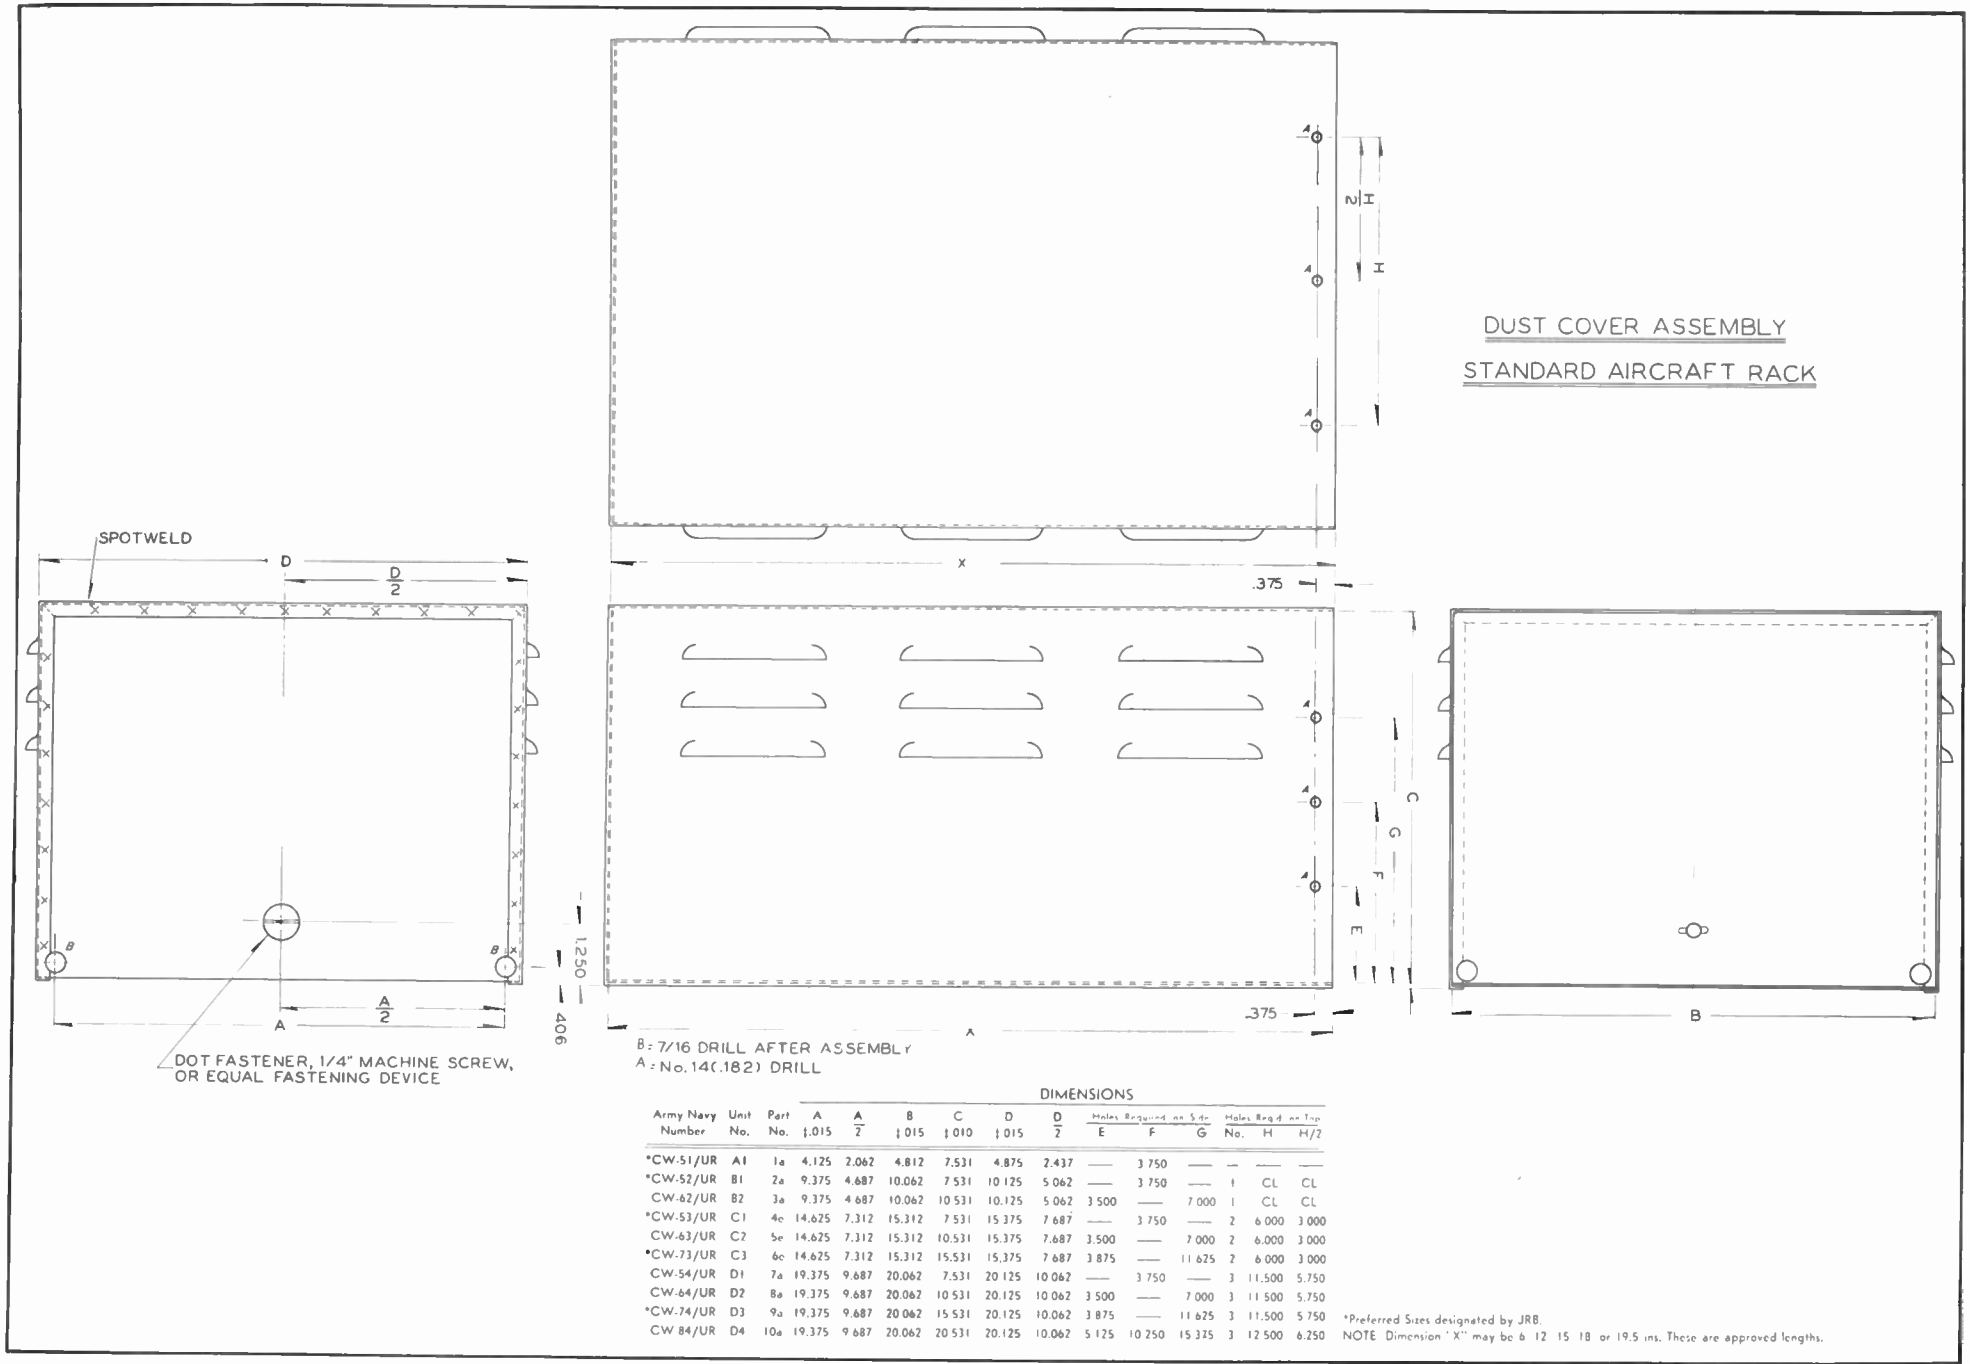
ONE-FOURTH SIZE DRAWING OF THE STANDARD DUST COVER ASSEMBLY. MATERIAL IS STEEL OR ALUMINUM, USE AND DESIGN OF LOUVRES IS OPTIONAL
